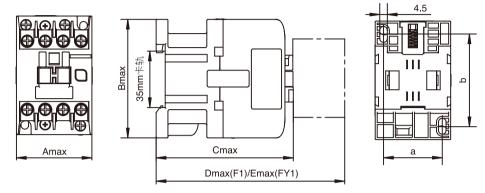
TGC1s-09~38 outline and installation dimensions drawings
